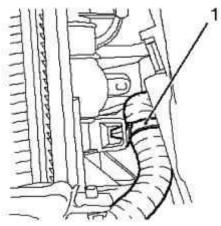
Wiring harness conditioner: 1 - clamp
